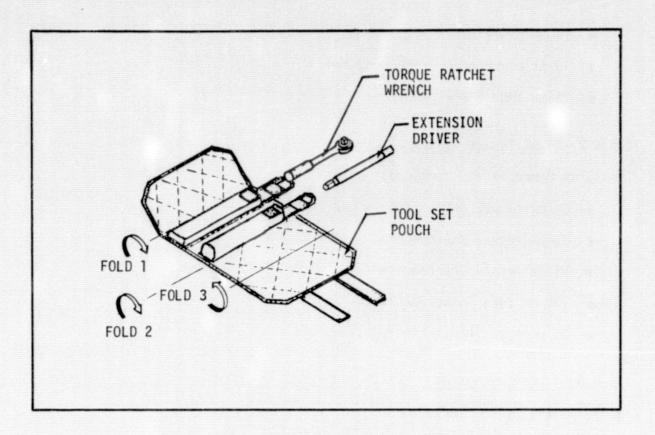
Shuttle Tool Kit Pouch Concept
